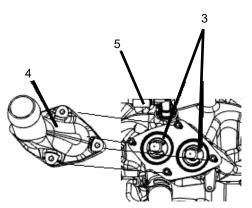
Thermostat Housing (4), Dual Thermostats (3), Lower Intake Manifold (5)
